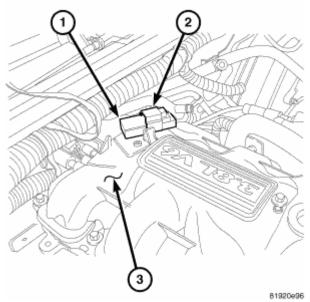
Map Sensor 3.8L Courtesy of CHRYSLER LLC
